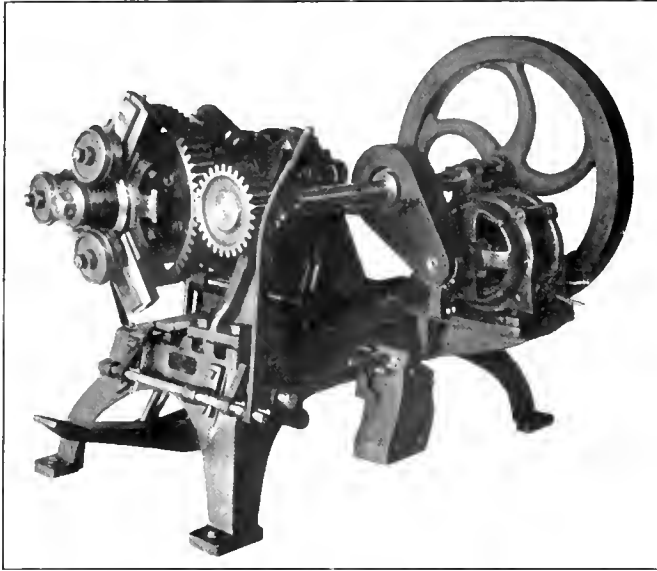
Hartz Motor Driven Welder with Gear Guard Removed.
